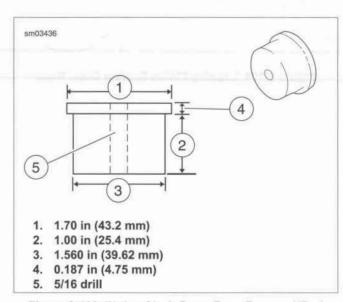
Pinion Shaft Outer Race Removal Tool
